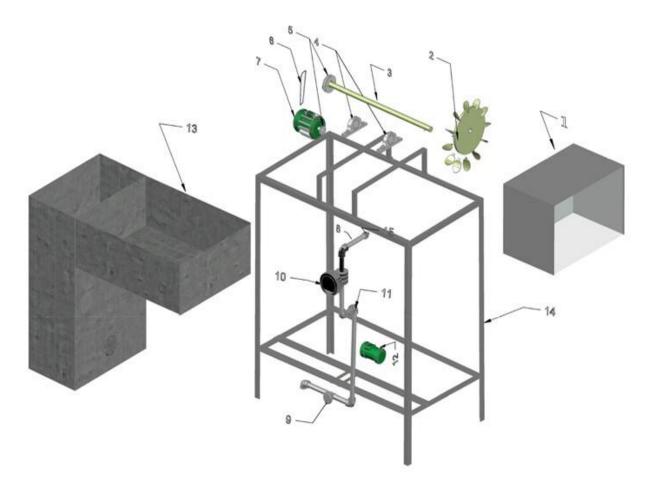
The exploded view of the Tablespoon Buckets Pelton Wheel
